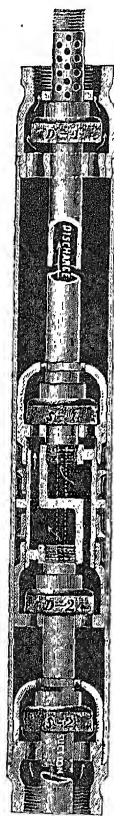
B.—Section through double acting pump cylinder. (Scott Valve Company.)
